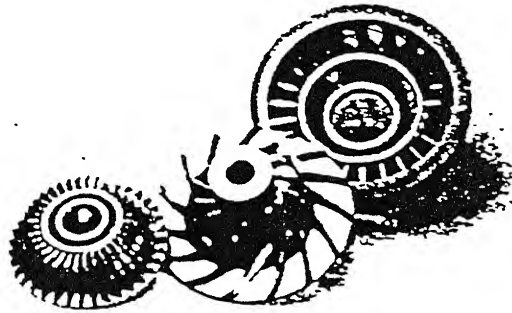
polishing of airfoil and gas path surfaces in turbine engine parts [15]
